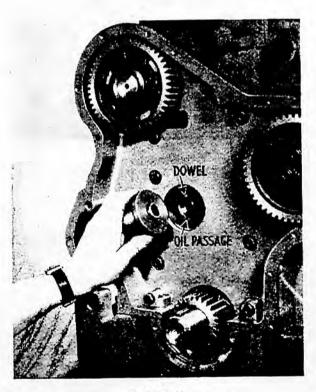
REMOVING IDLER GEAR SPIGOT
